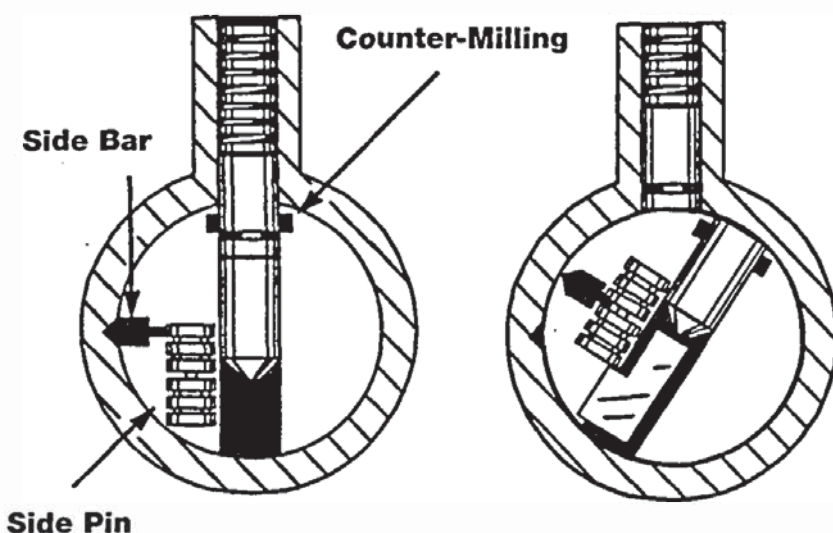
C. Frontal cutaway view of the ASSA V10: Making the most out of spool pins.
